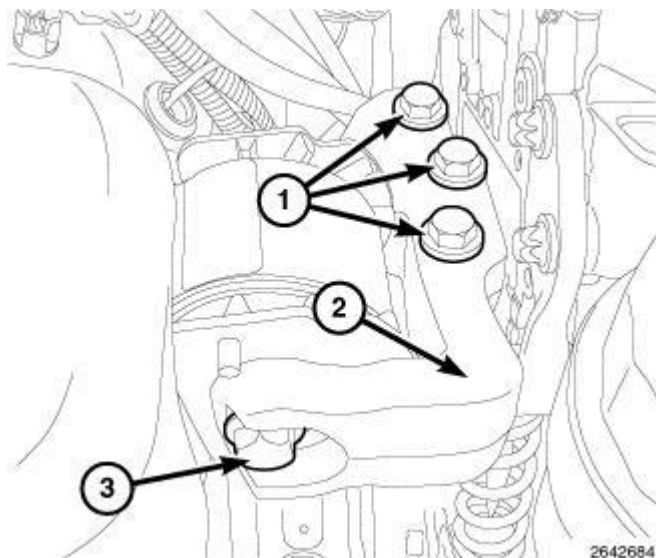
Engine Mount Carrier Bracket & Bolts
